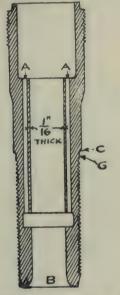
Sectional Elevation of Pneumatic Hammer.
